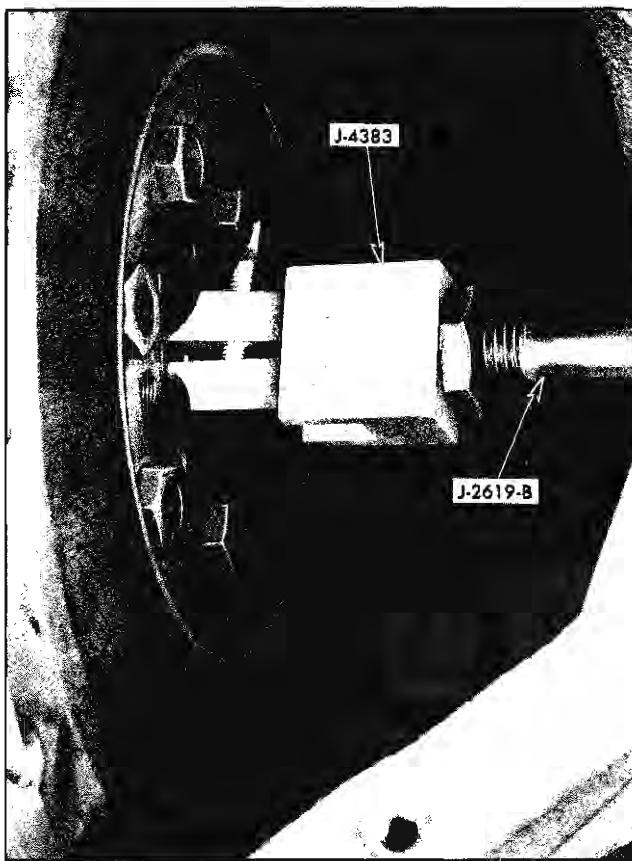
D-16 Removing Drive Shaft Pilot Bearing
